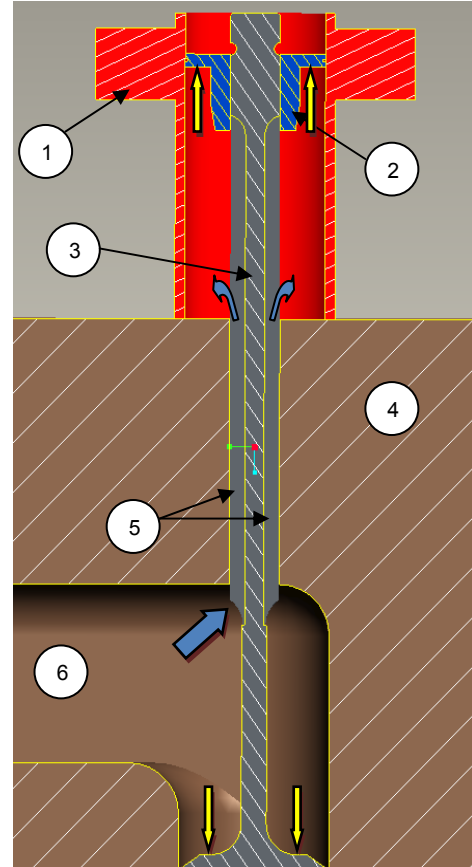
A simple cross section illustration of the pneumatic valve spring arrangement mounted on the cylinder head
